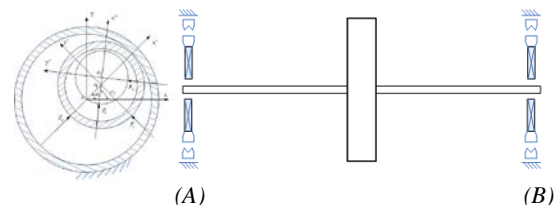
Structure Of Sfd-Sliding Flexible Bearing Rotor
